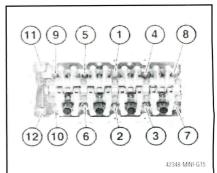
Cylinder head bolt tightening sequence—Cooper Coupe
